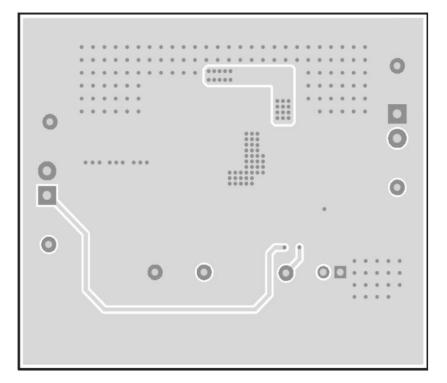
TPS54202HEVM-716 Bottom-Side Layout
